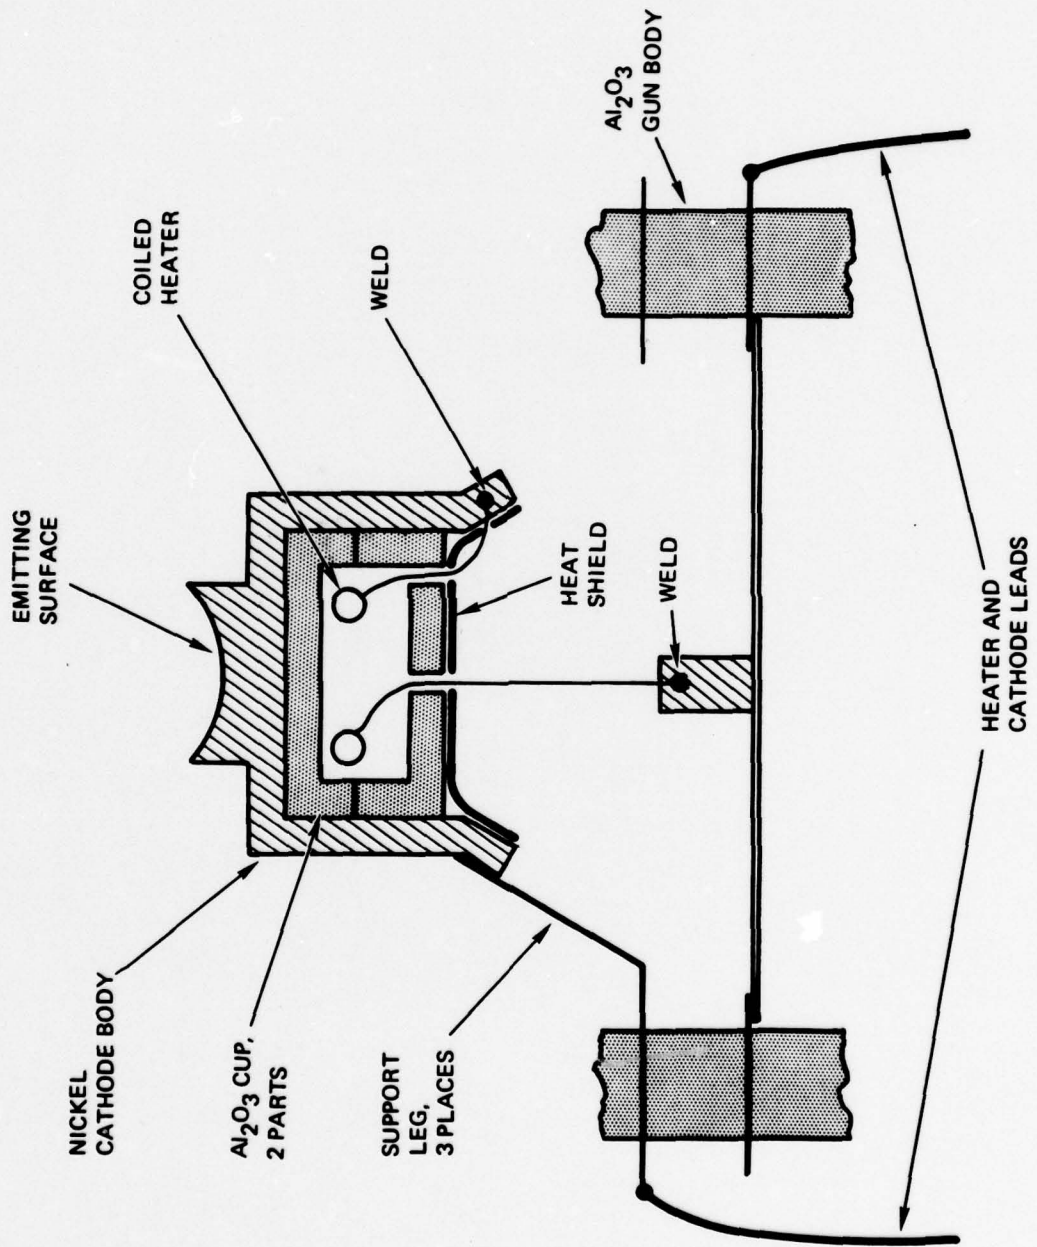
Cross-Section of Heater-Cathode Assembly. (The critical part of the assembly is the point where the heater lead passes through the aluminum heat shield.)
